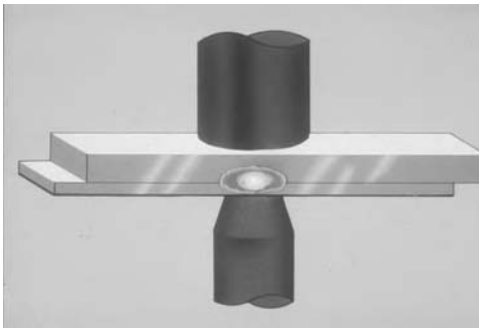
Smaller electrode diameter to concentrate welding zone closer to a thinner section
